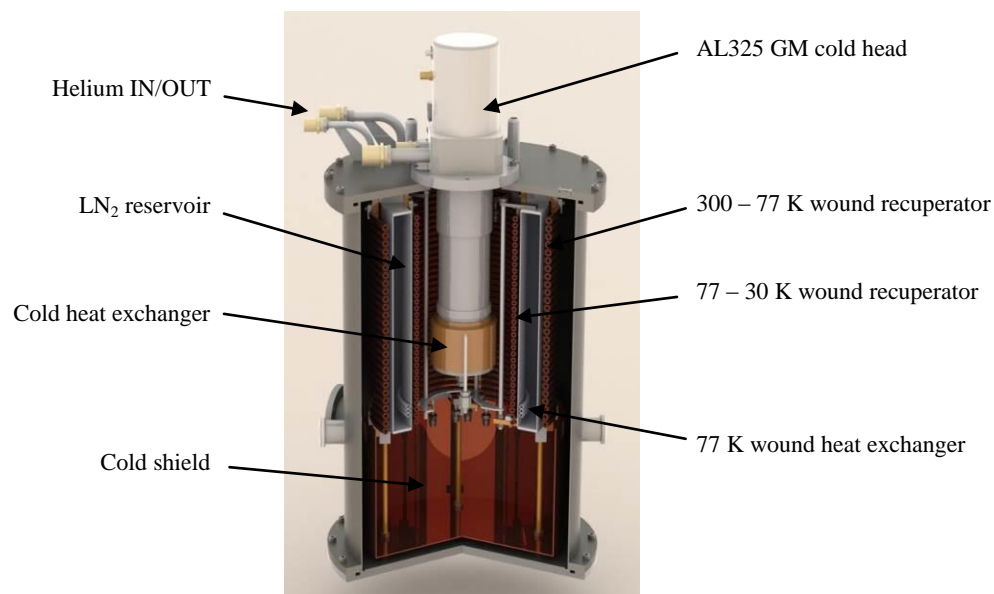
CAD section view of the 30 K cold helium cooling loop cryostat.
